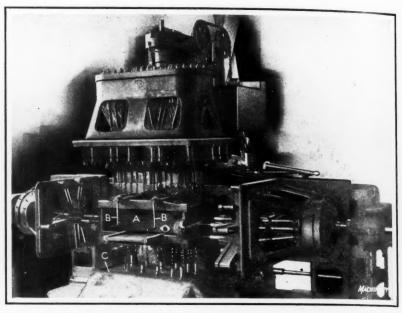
Drilling Four Sides of Lower Part of Crankcase simultaneously
